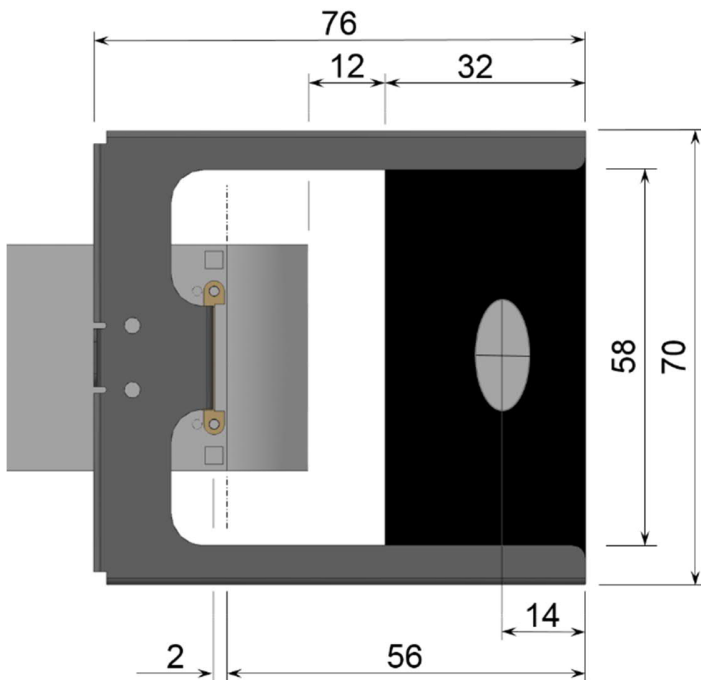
Back view of the stripping foil holder attached to the rotating belt with foil dimensions for the PSB injection and an illustration of the beam stripping point.
